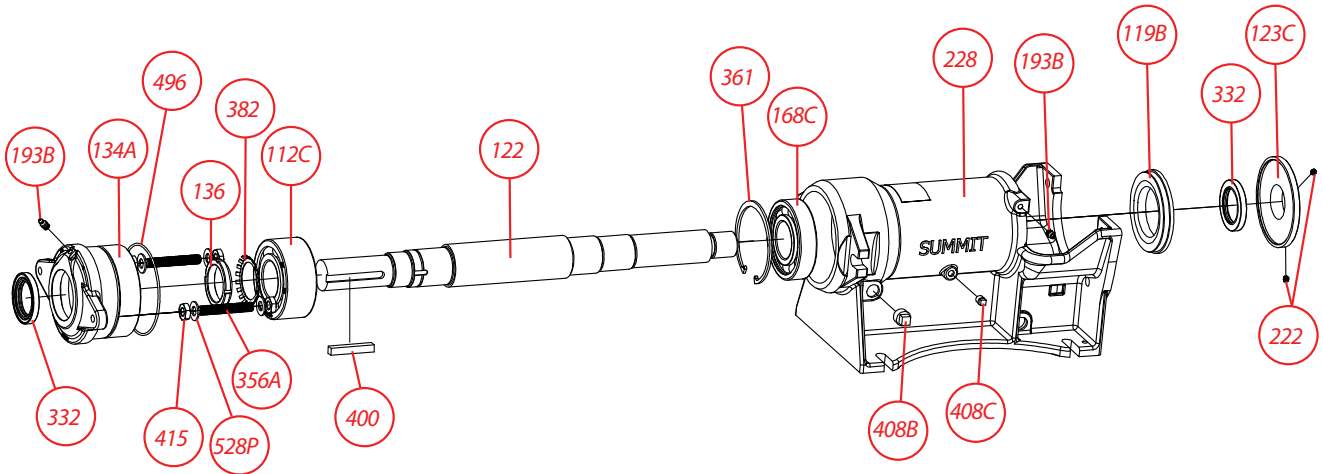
Power End Frame 1 thru 4 greased lubricated
